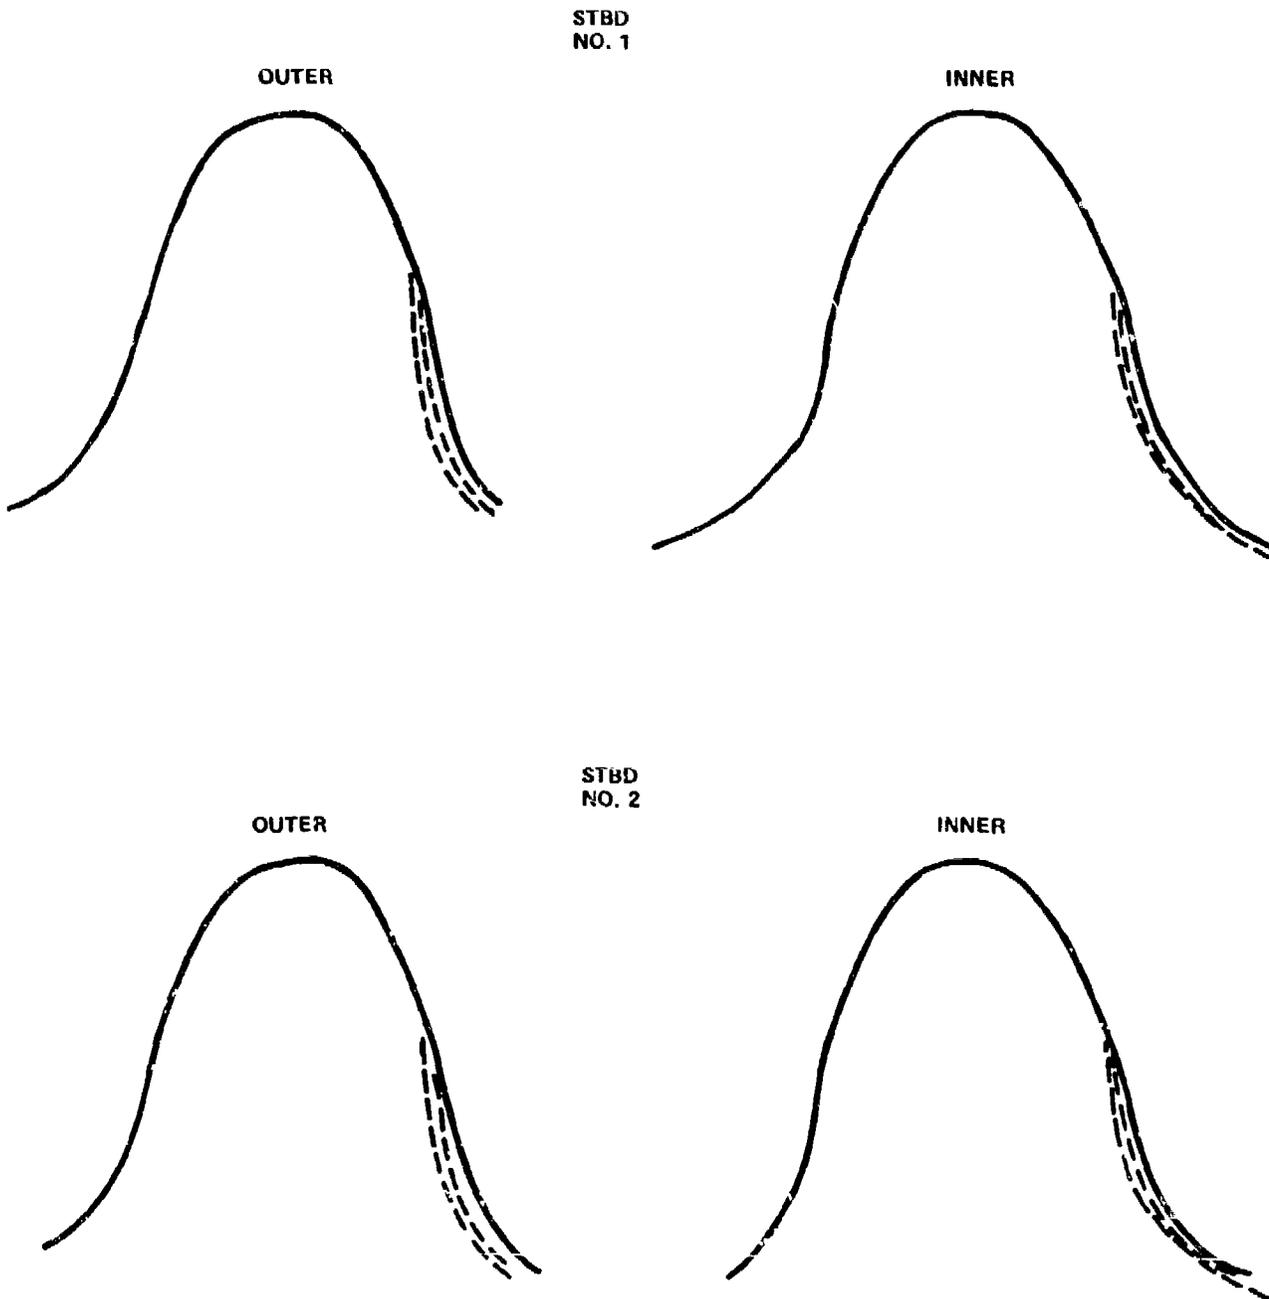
Aluminum Track Sprocket Wear (Starboard Side, 25- and 48-Hour Tests)
